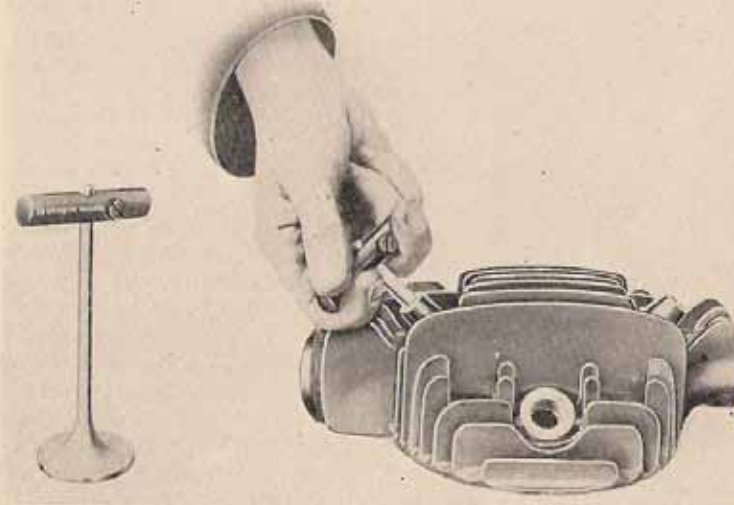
USING THE A.J.S. VALVE GRINDING TOOL
